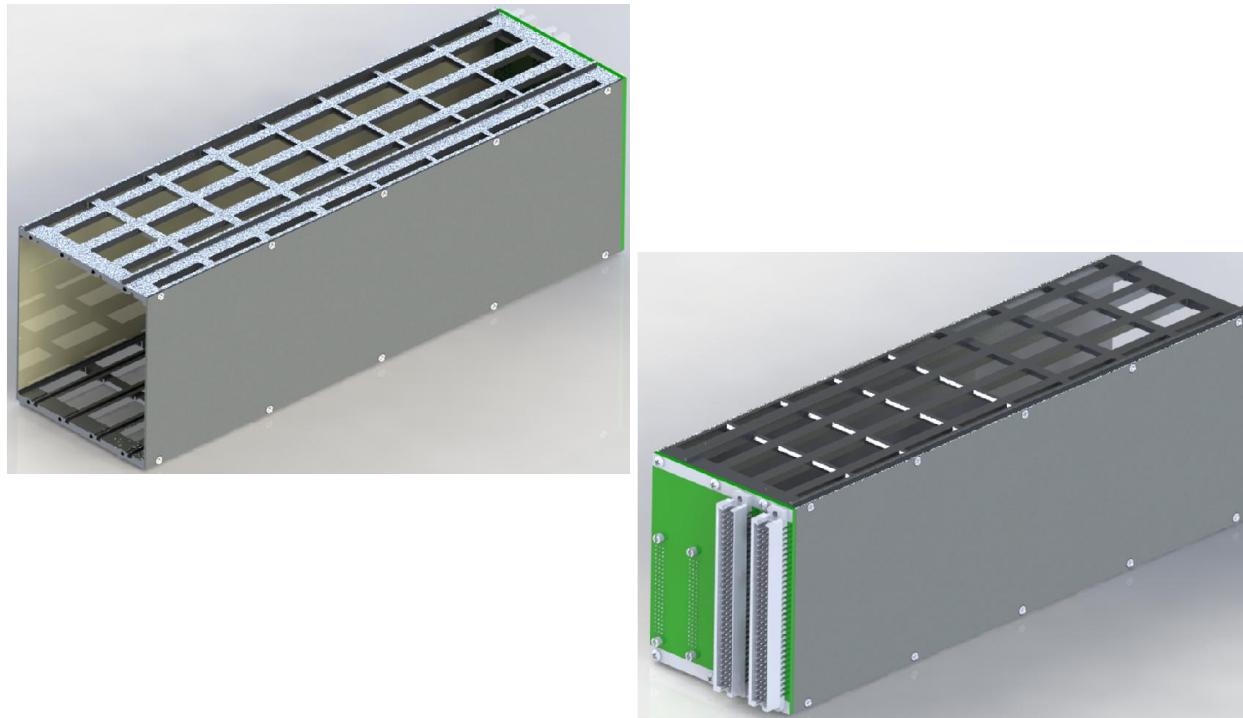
EX1200-SMP-4 CARRIER MODULE (FRONT & REAR VIEW)
